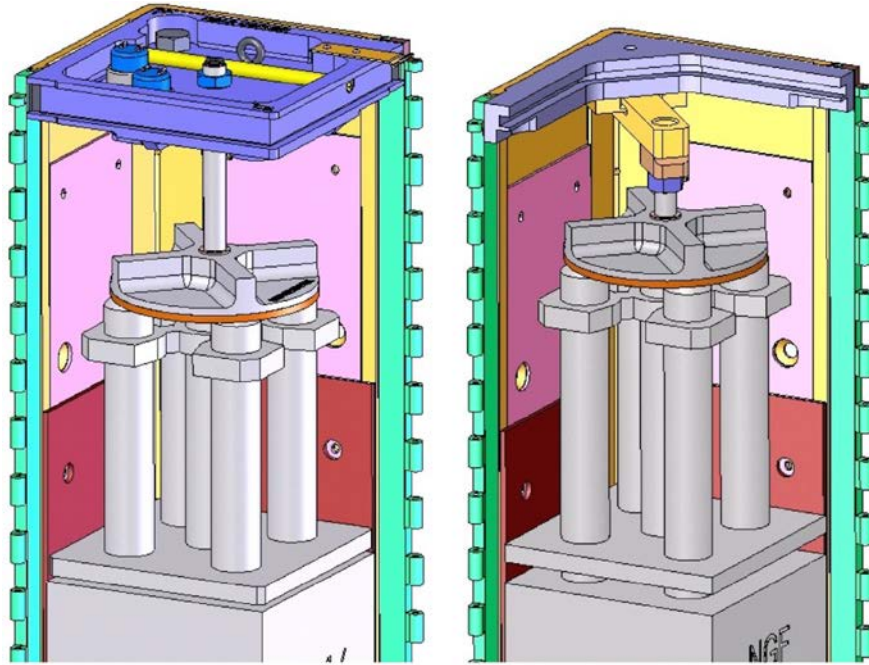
Center Plate Axial Restraint – Removable Top Plate (left), Fixed Top Plate (right)
